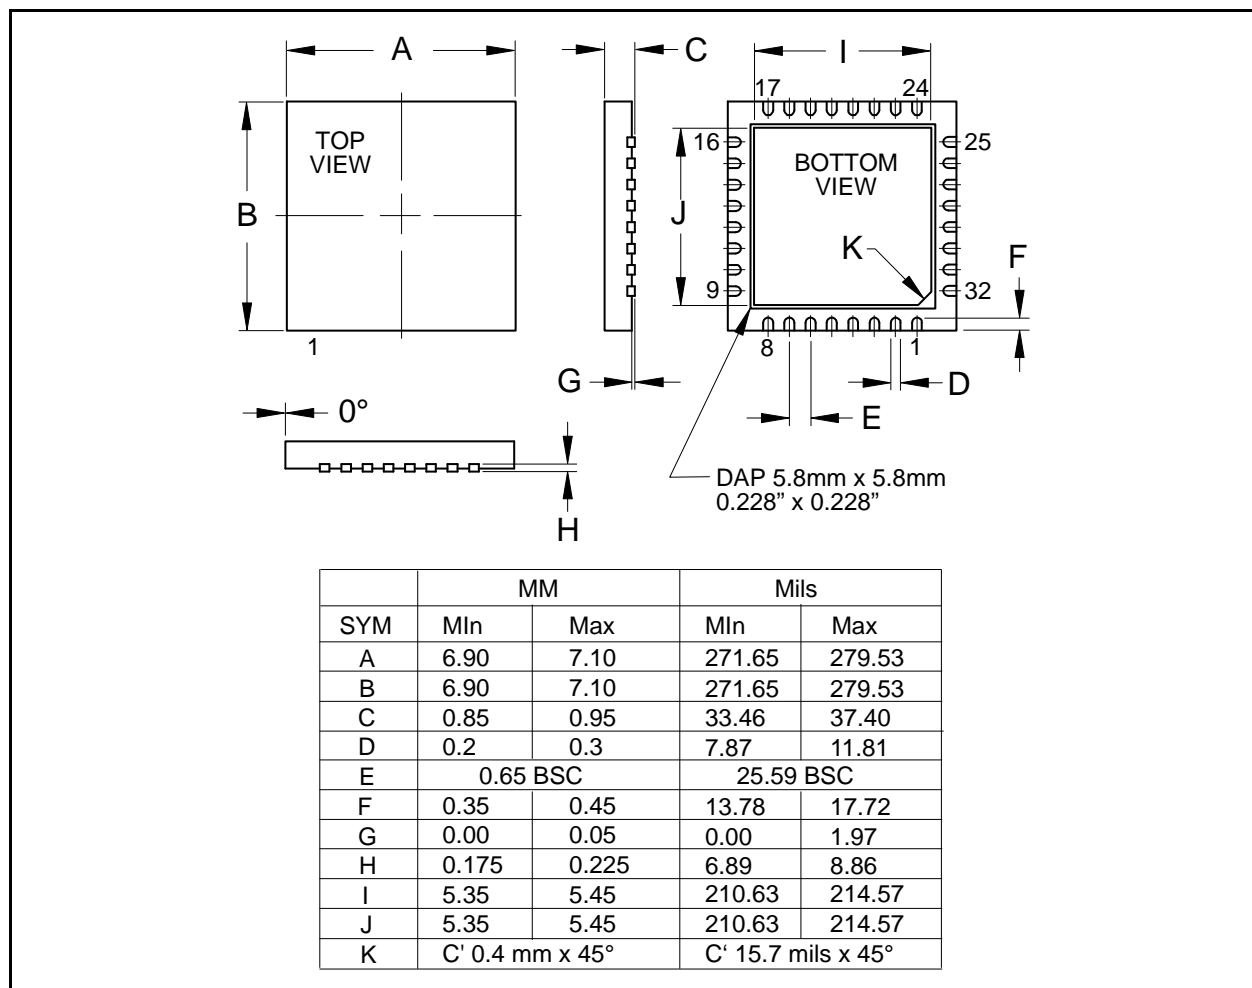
7 x 7mm QFN32 Package Dimensions.
